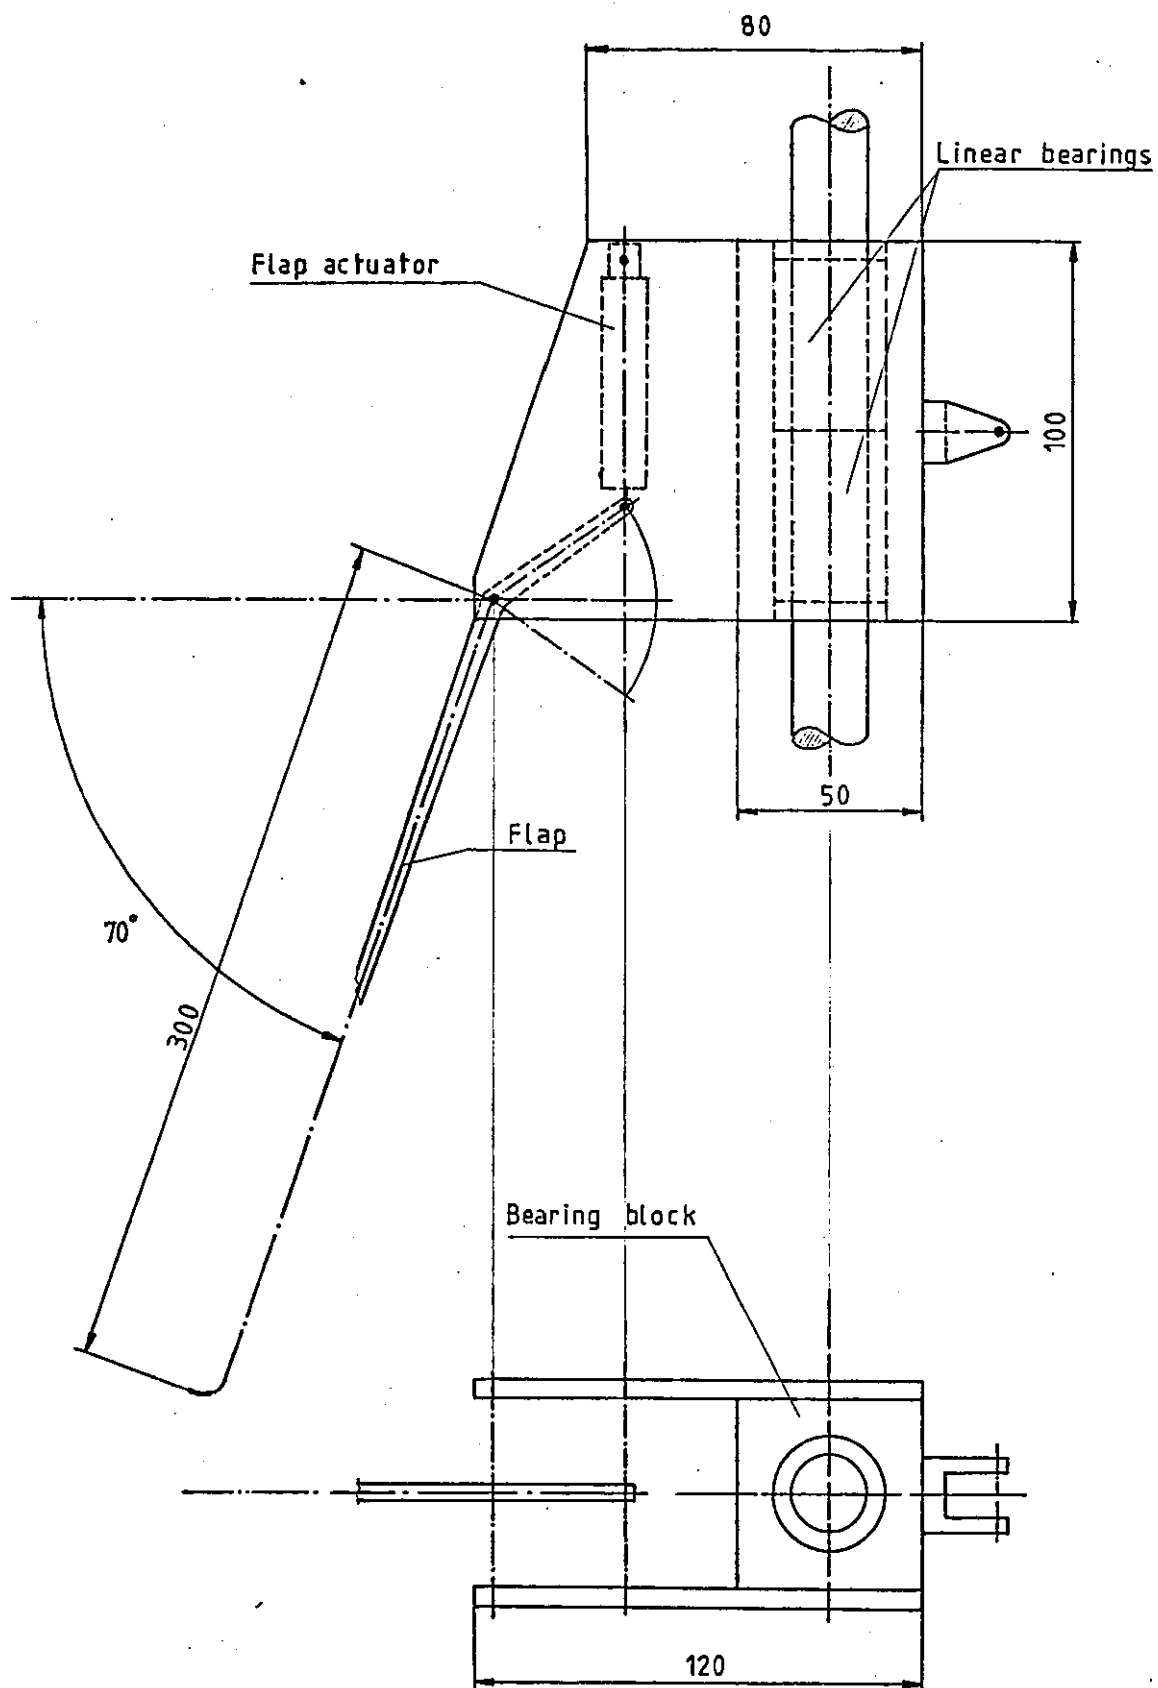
Preliminary sketch of the lift neck device assembly.
